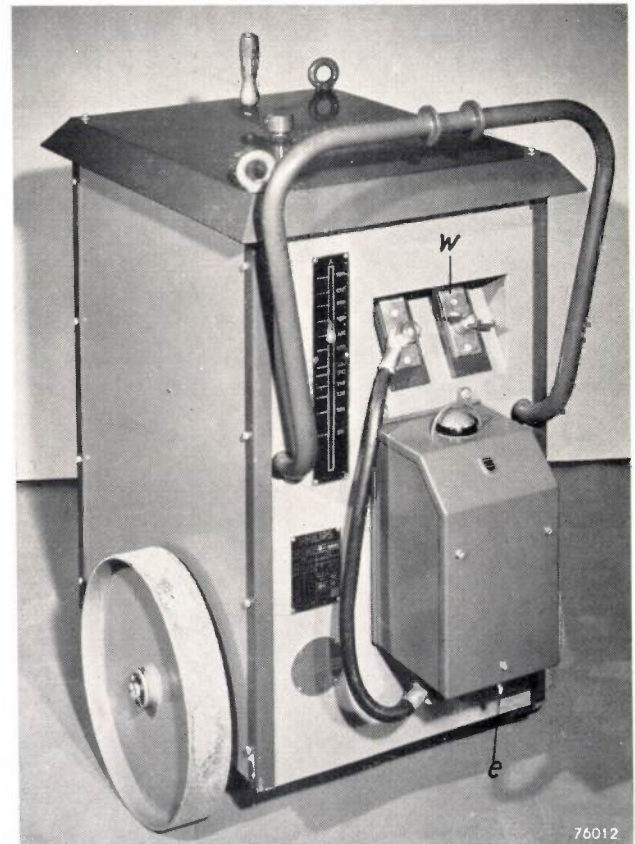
The protective appliance PE 3100 mounted on a welding transformer. The work has to be connected to the terminal w , the welding rod to the terminal e .
